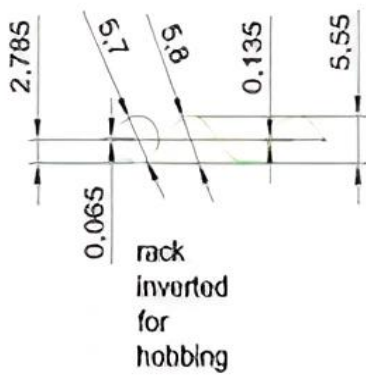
Design By Applying Gear As Numerical Shaping
